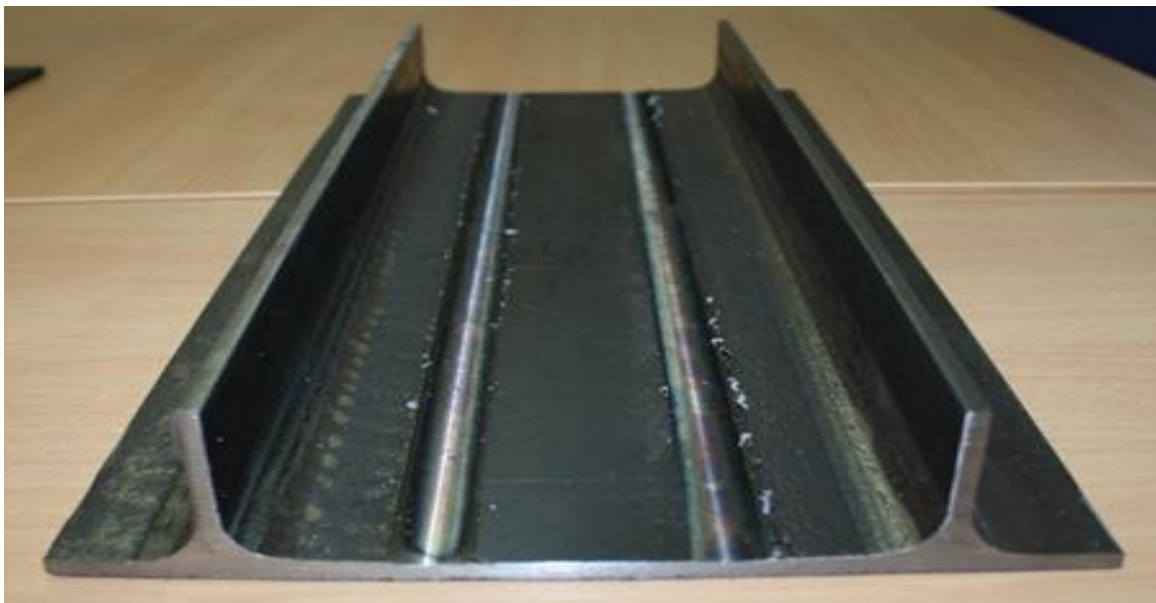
Integrally Stiffened Plate demonstration piece fabricated by friction stir butt welding two rolled T sections to a steel plate
